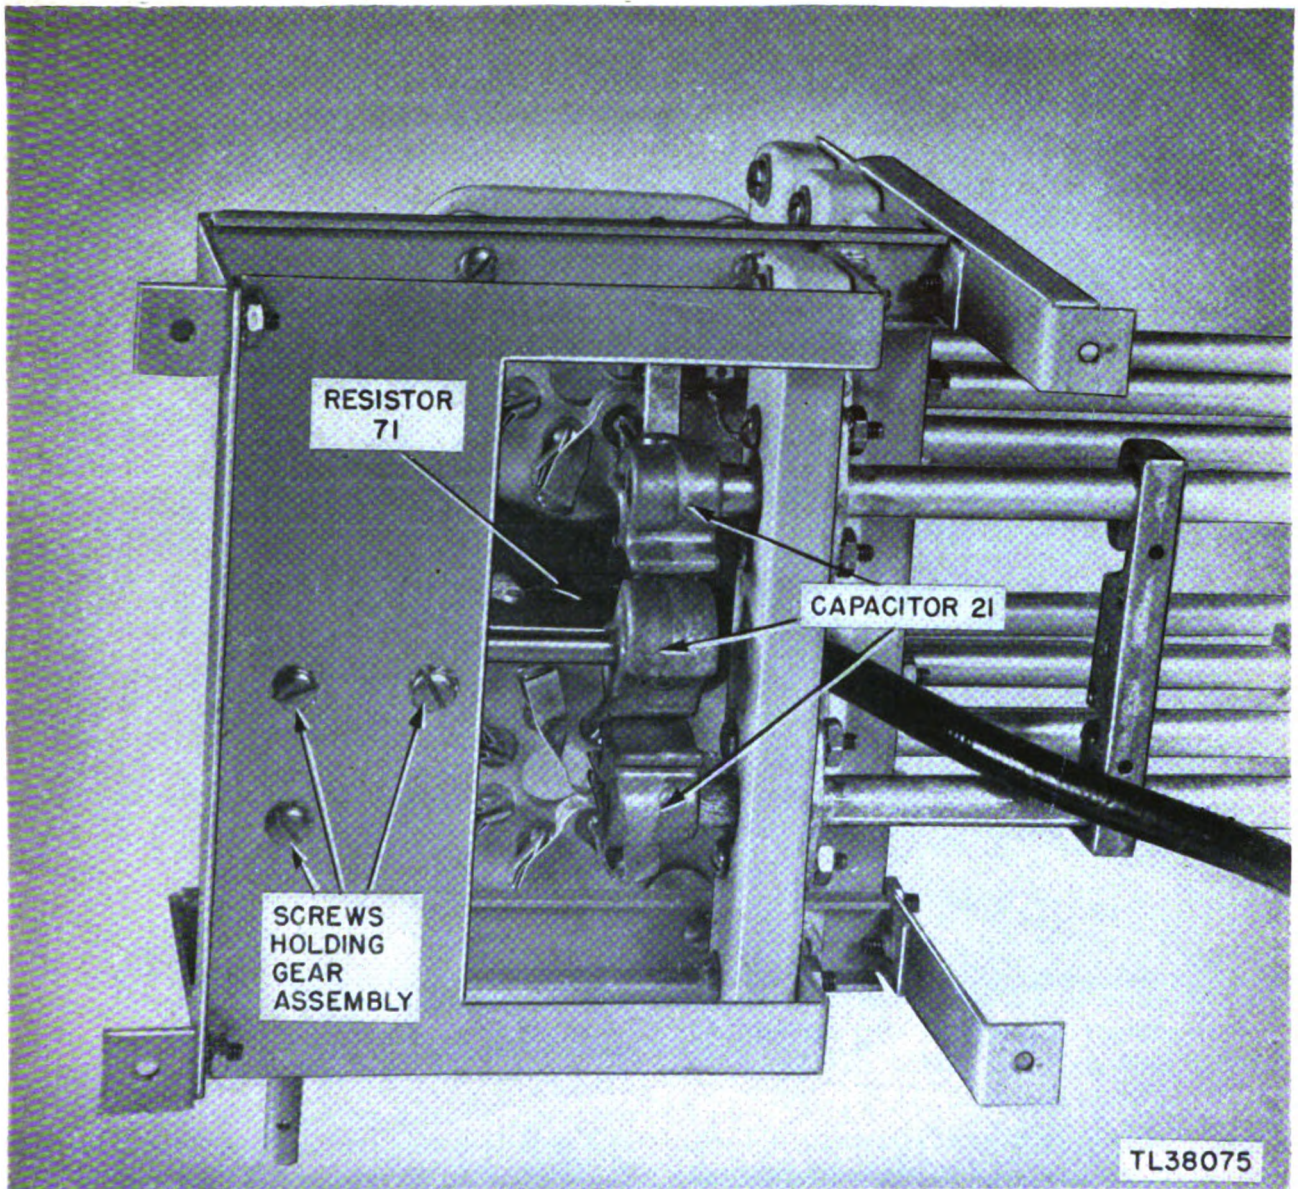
Oscillator assembly, underside, showing capacitor 21 and resistor 71.
